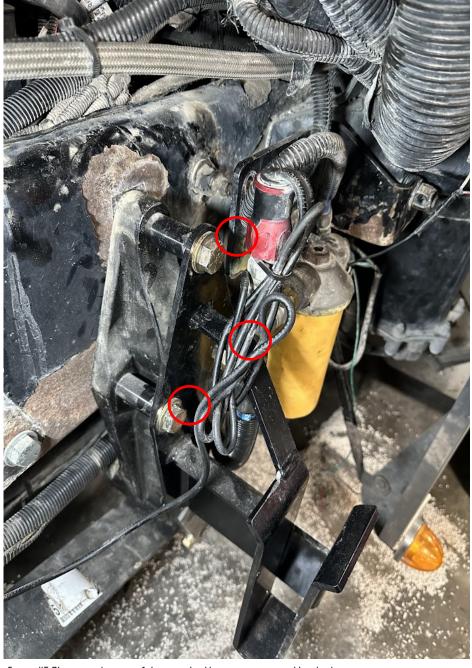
Shows new location of the rear shackle mount casting and hood relocation mount.
